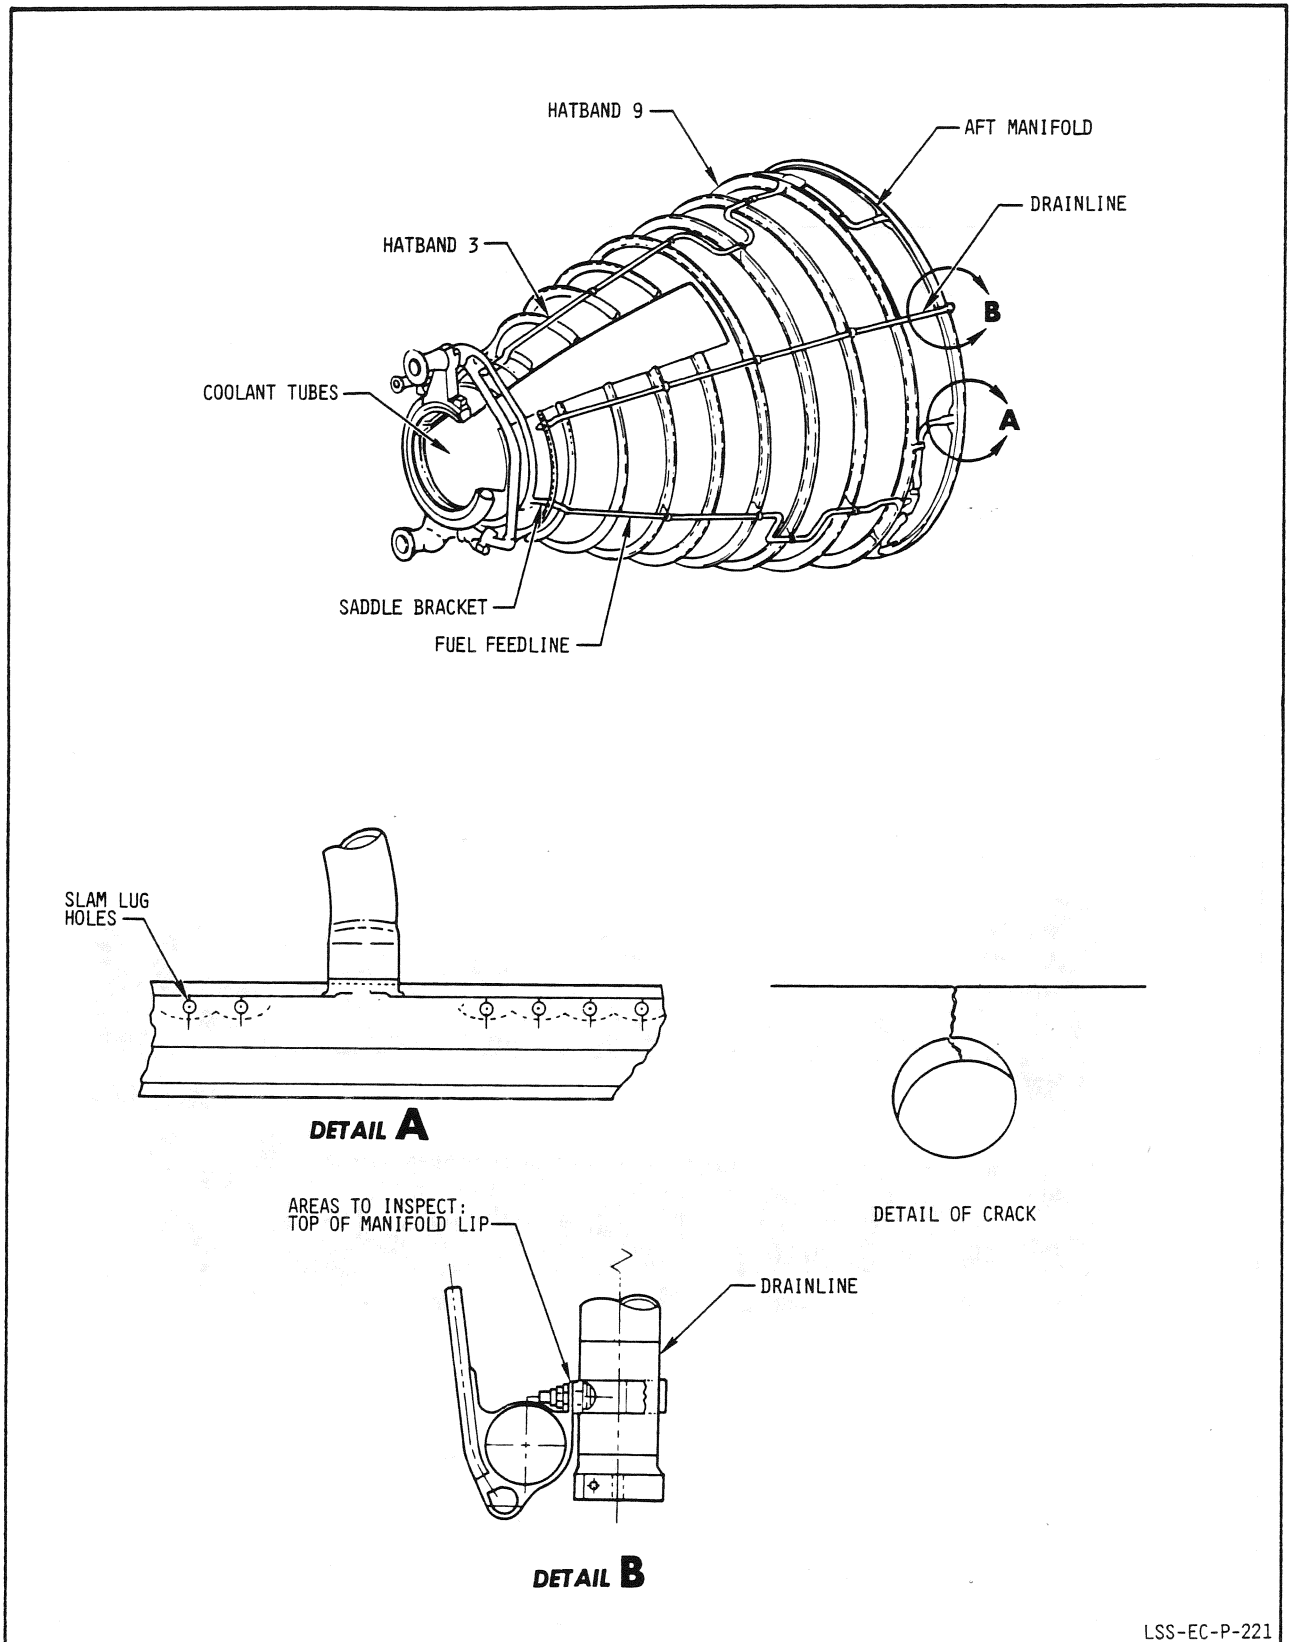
Drainline and SLAM Lug Hole Inspection
